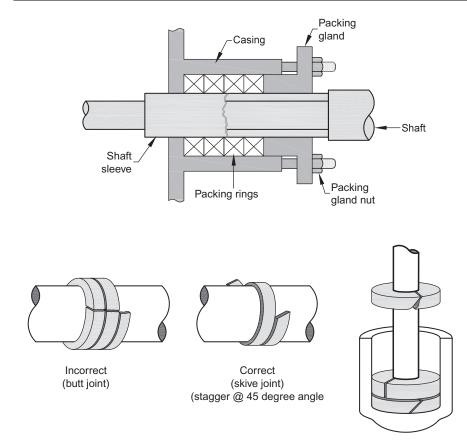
Packing: (top) soft packing controls shaft leakage; (bottom) correct and incorrect packing installation.
